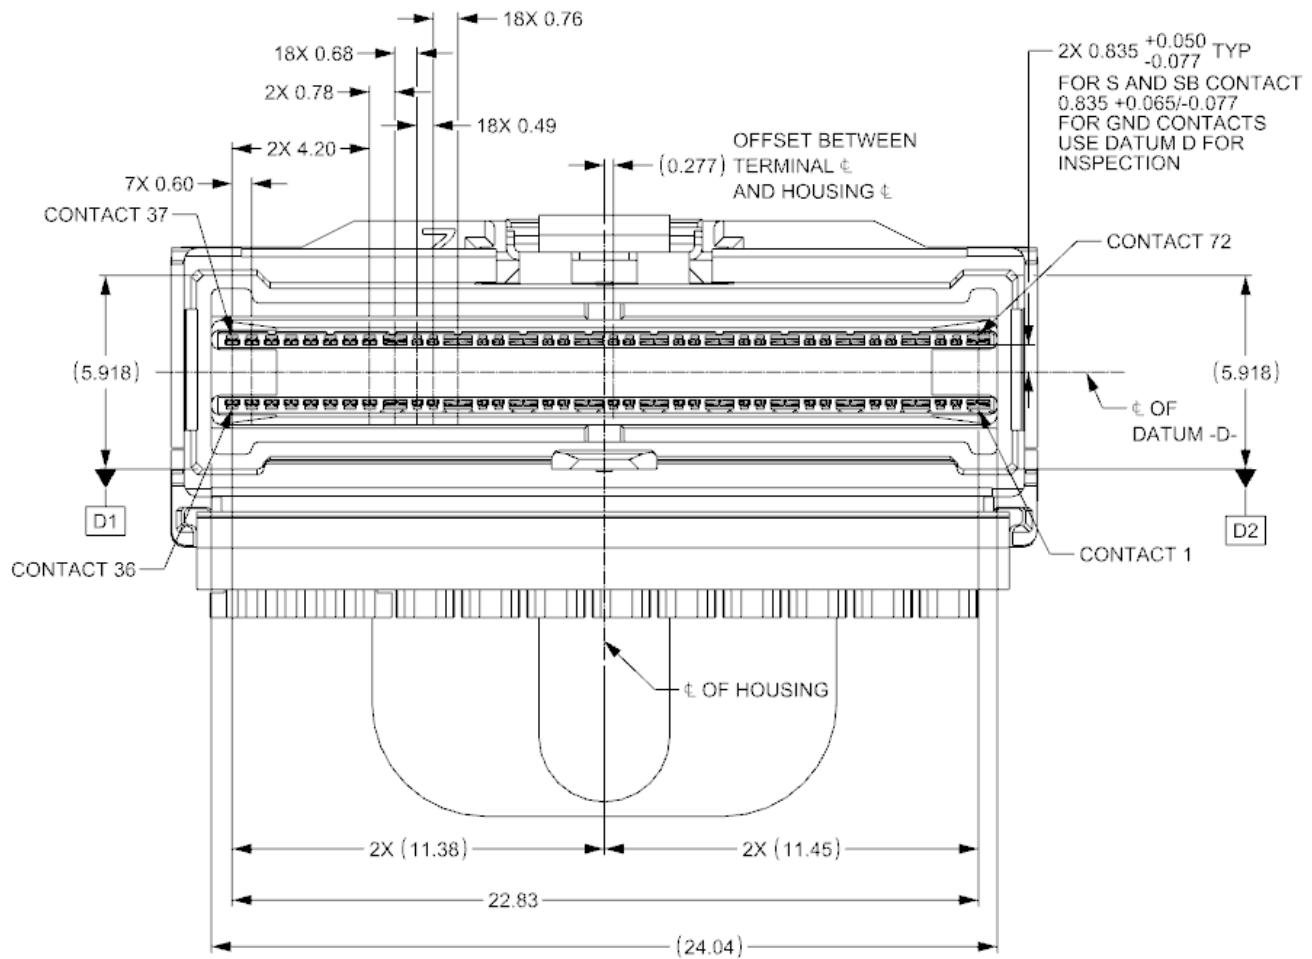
Top View of Free-Side Connector in Relation to Housing
